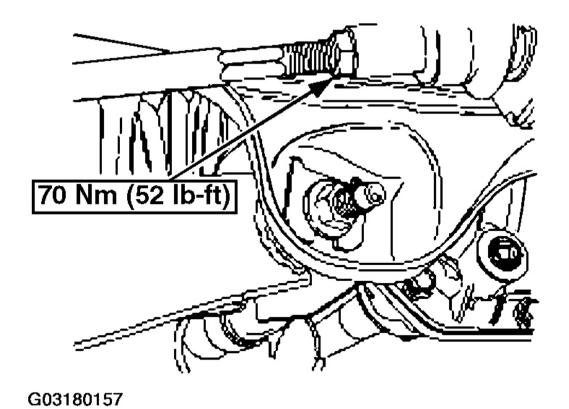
Tightening Nuts While Holding Adjuster Courtesy of FORD MOTOR CO.
